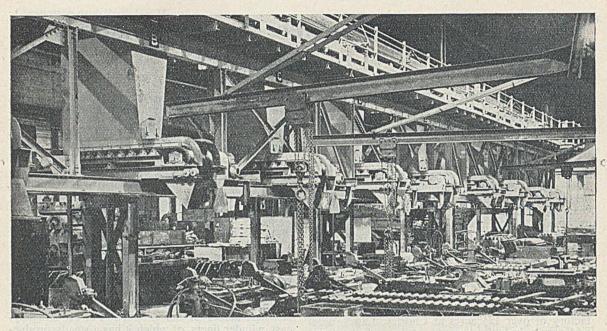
Set-up for the Machine Moulding of Engine Castings at Leyland Motors, Limited.
